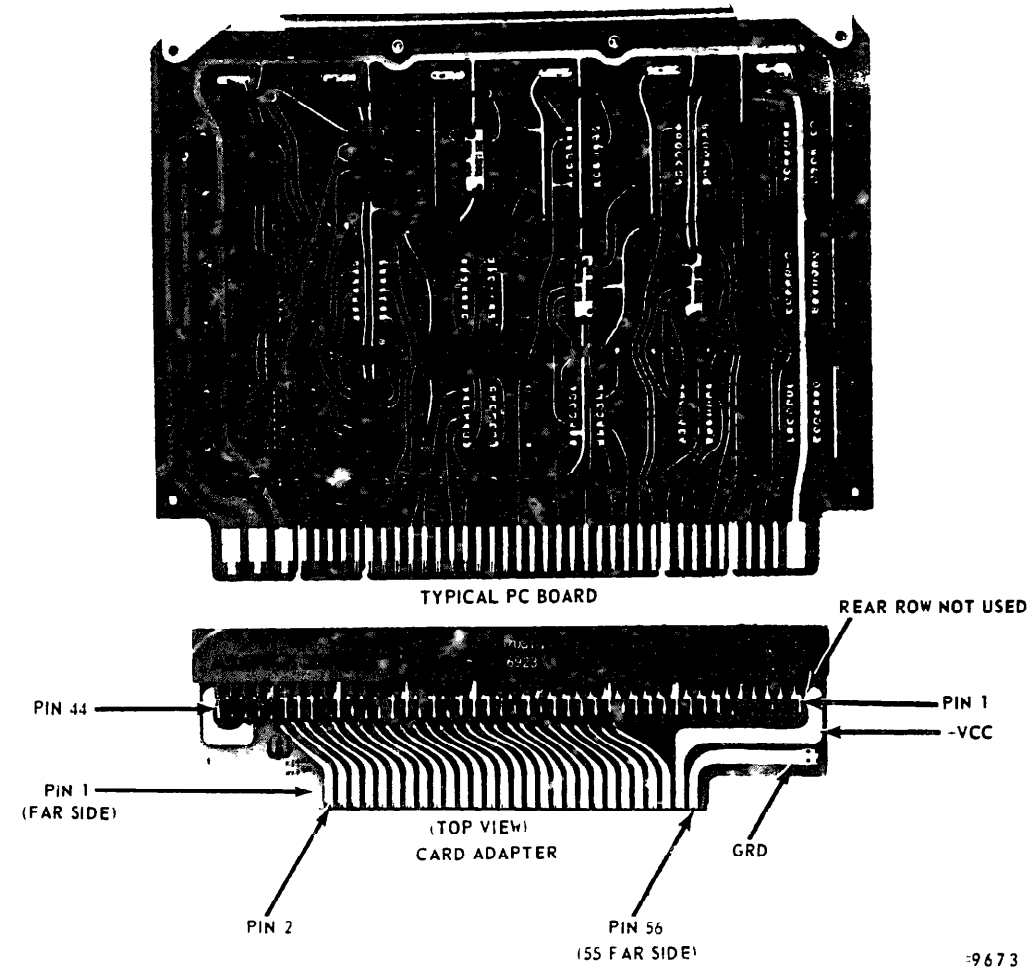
Printed Circuit Card Adapter MX-9090/USM-371
